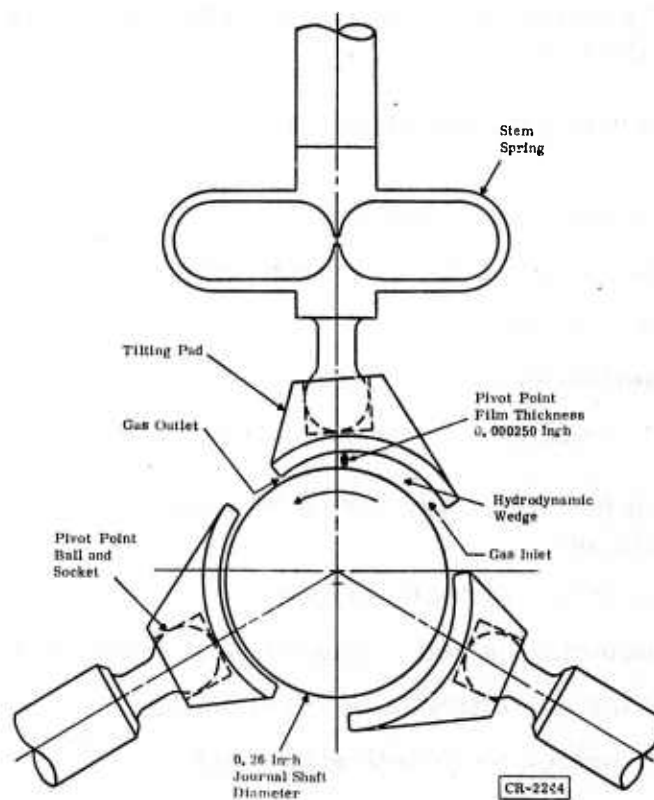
Cryogenic Turboalternator Tilting Pad Journal Bearing
